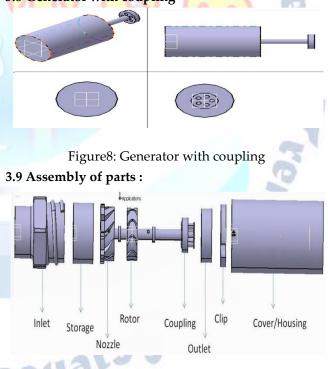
Assembly of micro gas turbine parts 4. Design of Turbine Blade
